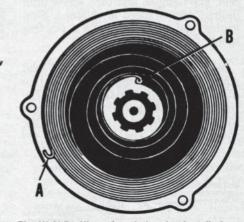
View of rewind spring installation in starter cover. Hook outer loop (A) of spring in notch as shown. Inner loop (B) of spring must be curved inward to engage notch of spring lock.
